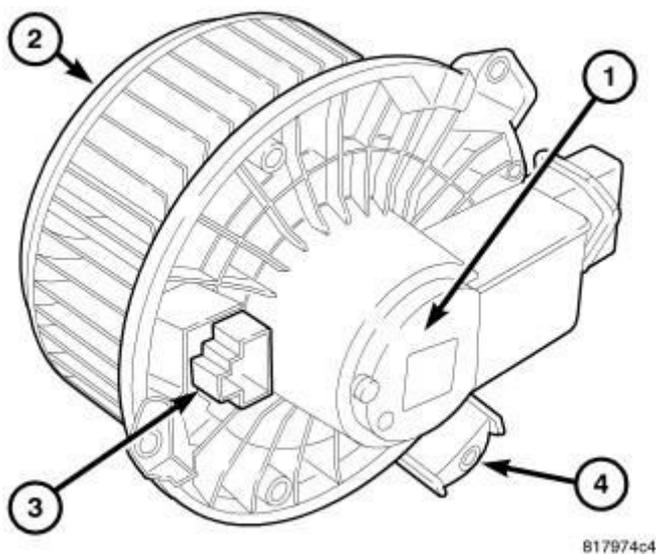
Blower Motor, Blower Wheel, Harness Connector & Mounting
